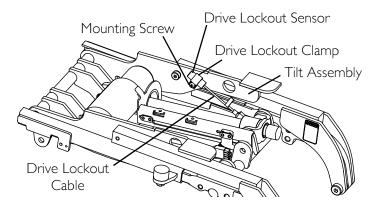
Replacing the Drive Lockout Sensor / Adjusting the Drive Lockout Sensor
